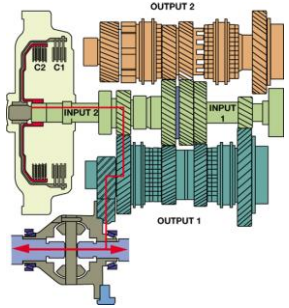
First gear engaged using clutch 1 (C1) to transmit engine torque.
